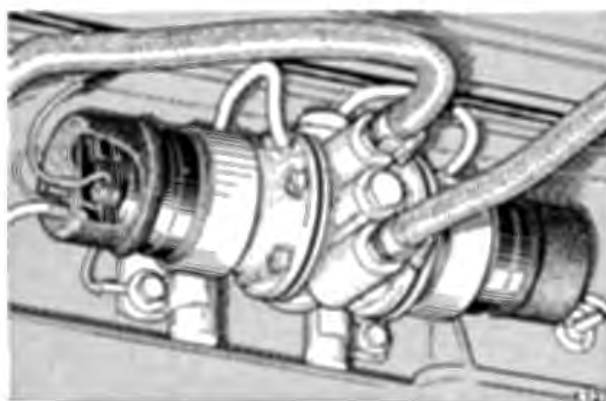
FUEL PUMPS WITH STONE GUARDS REMOVED
